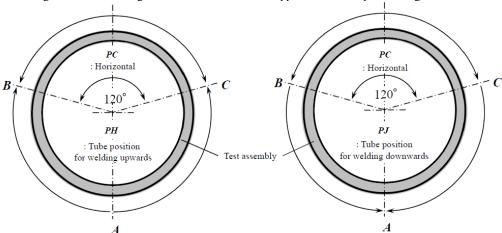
Welding for Tube Test Assemblies Applied with Tube Positions for Welding Upwards or That for Welding Downwards
